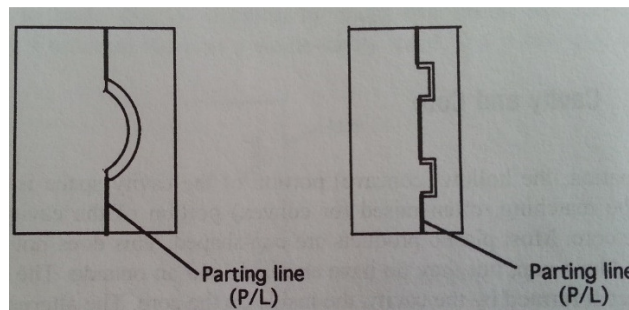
Parting Line of Mould (Herbert, *Understanding Product Design for Injection Molding*)
